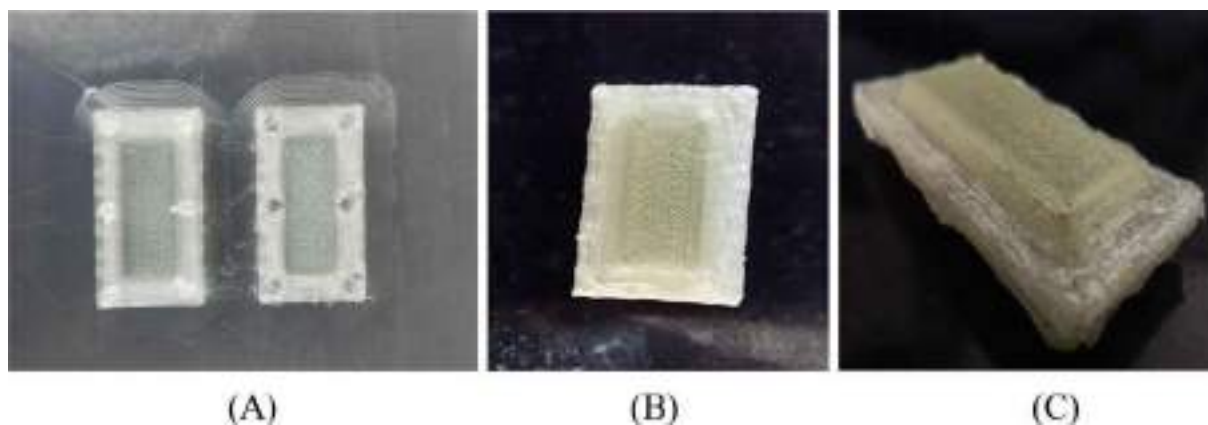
Various images of 3D-printed wafers (a) two parts of the wafer (left: bottom part & right: top part), (b) complete wafer assembly (Side view), (c) complete wafer assembly (Perspective view), respectively.
